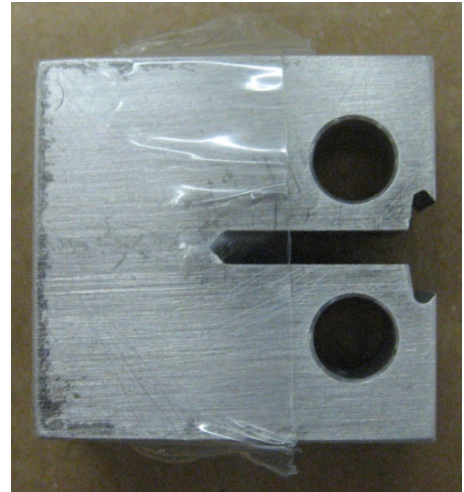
Specimen coated with heat shrink providing envelope for liquid metal.
